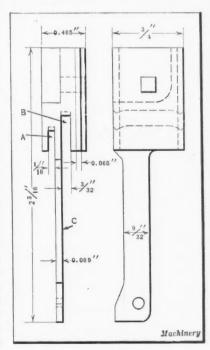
Enlarged View of Die-casting produced in Die shown in Fig. 2
